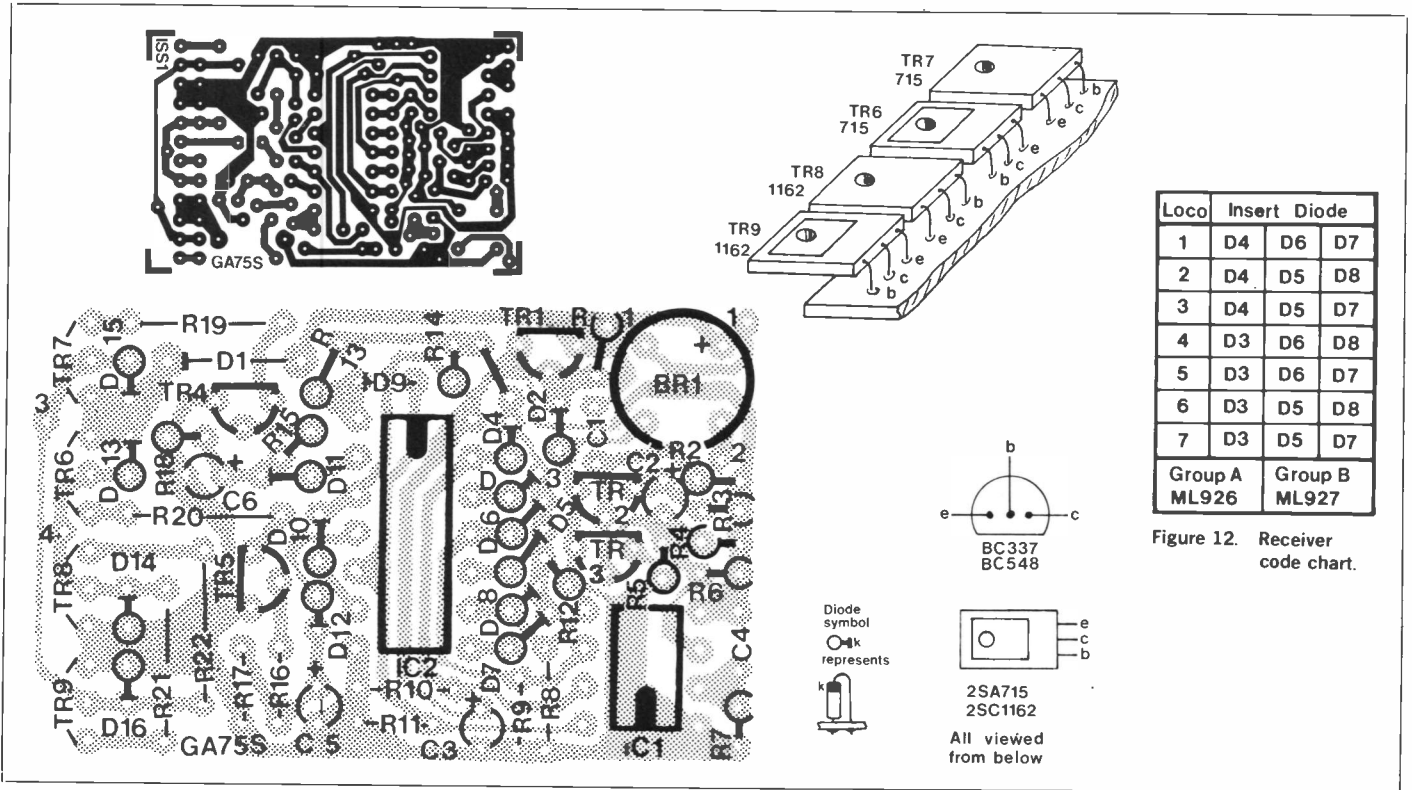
(a). Receiver board 2 track layout component overlay. (b). Receiver board 2 transistor mounting.
